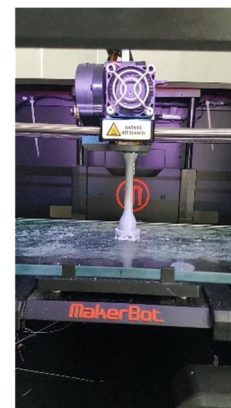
Specimen Being Printed in a Makerbot Replicator 2 3D Printer.
